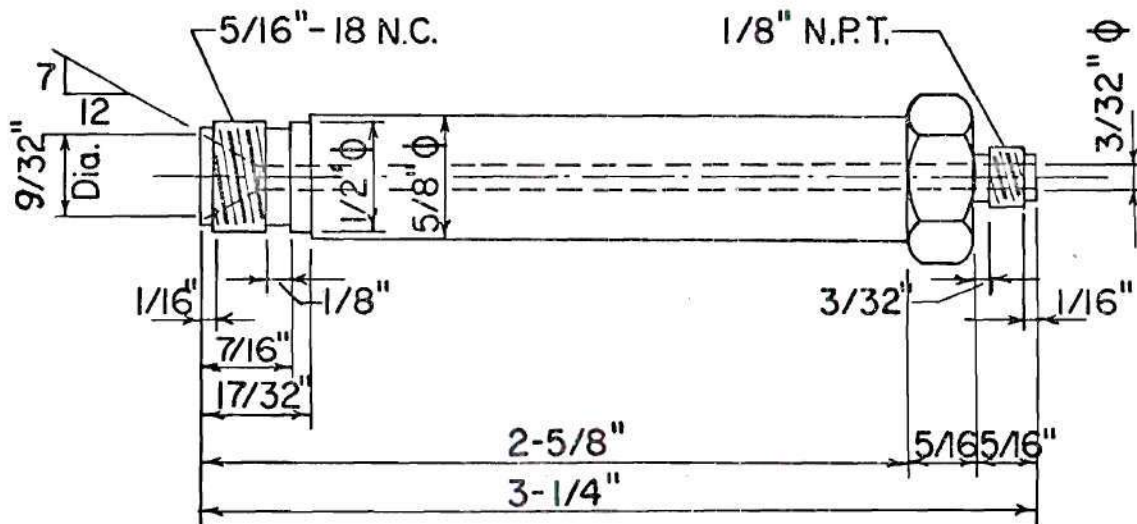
Stainless Steel Powder Feeder Discharge Nozzle.
